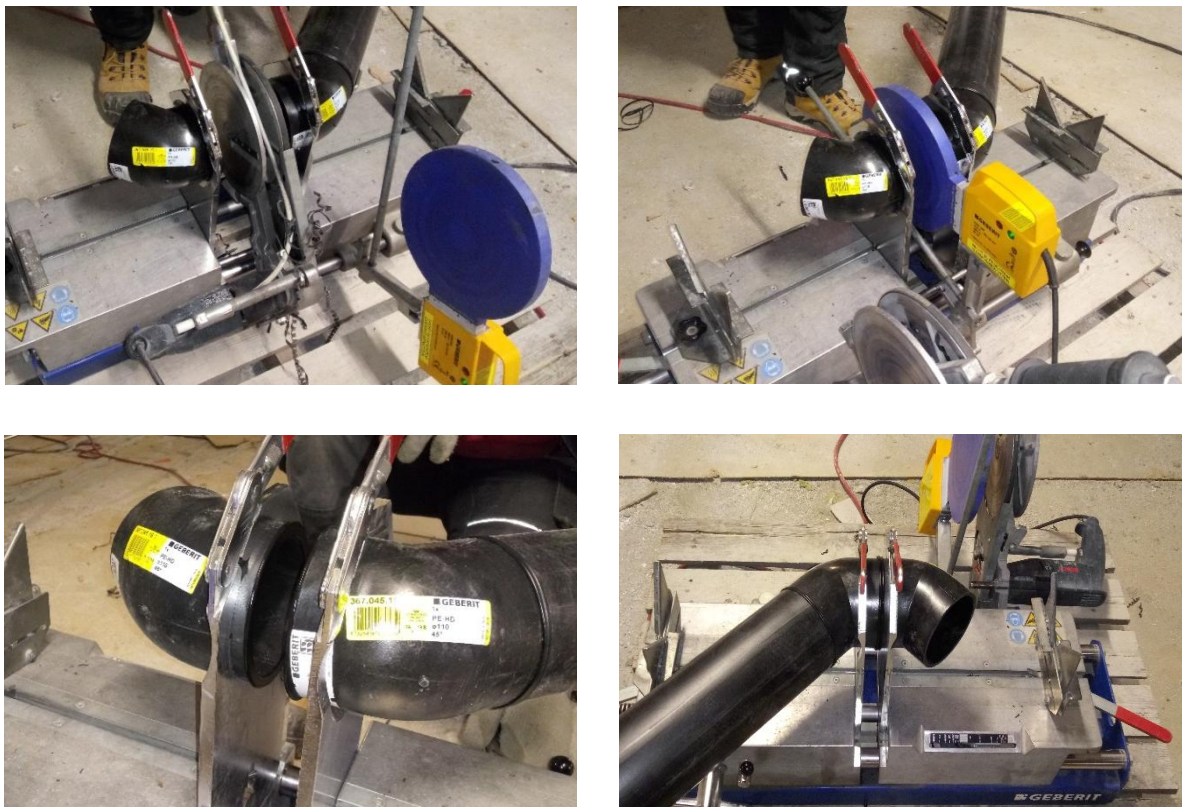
(top left) contact surface trimming; (top right) material heating; (bottom left) pressing together the welded elements; (bottom right) cooling phase. (own source)
